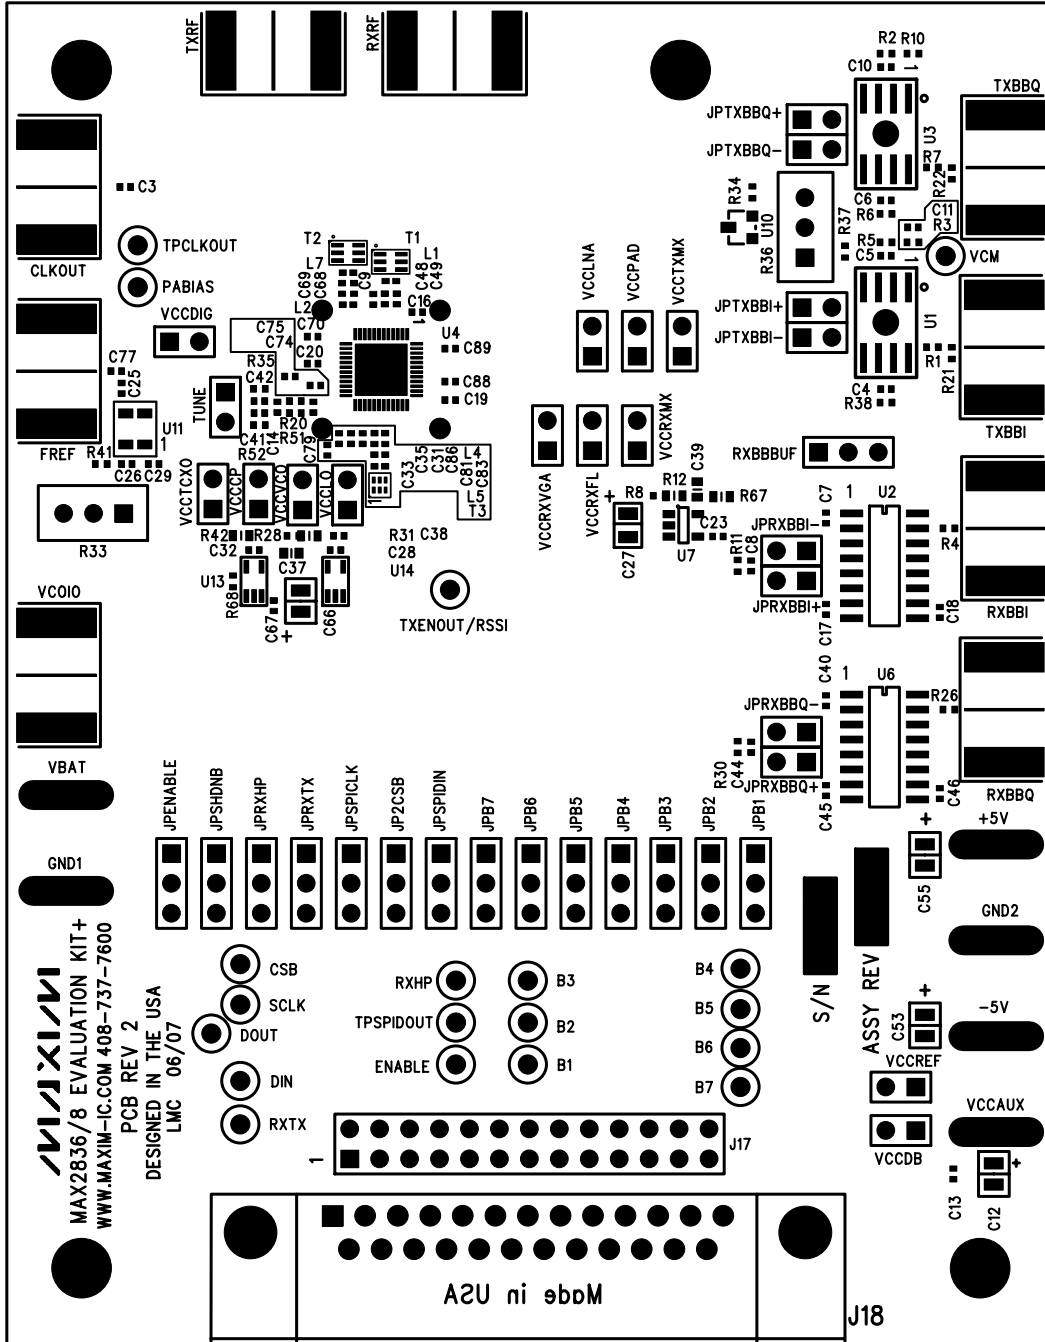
MAX2838 EV Kit PCB Layout—Top Silkscreen
